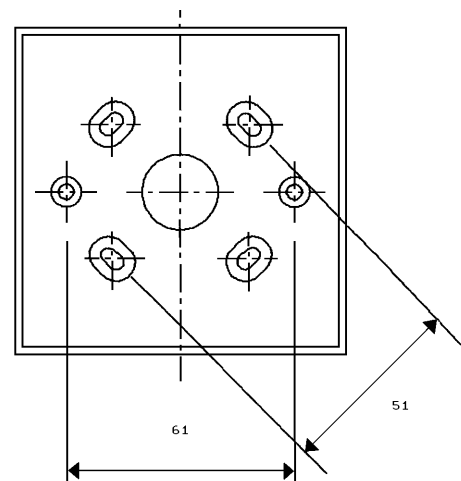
CP820/CP820M Fixing Dimensions Surface Mounting
